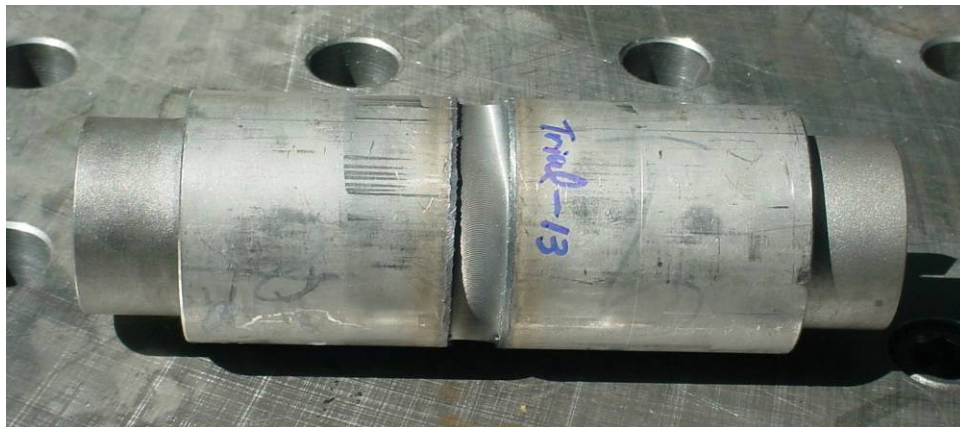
Close-up Photo of Tube Weld Fixture Setup for Welding MA956 Tube
